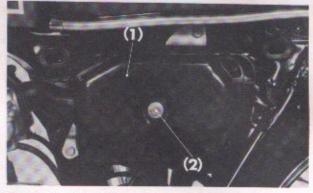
(1) Air cleaner case (2) Case mounting nut
